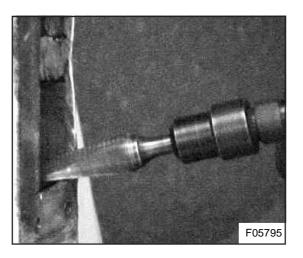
Deburring cut-out edges to provide beveled welding seam
